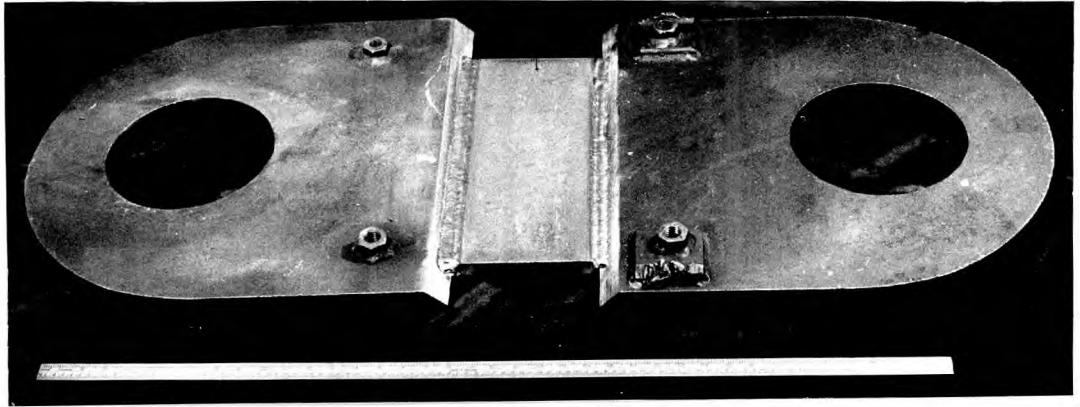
Specimen and loading lugs as used in the 300 ton tensile rig.
